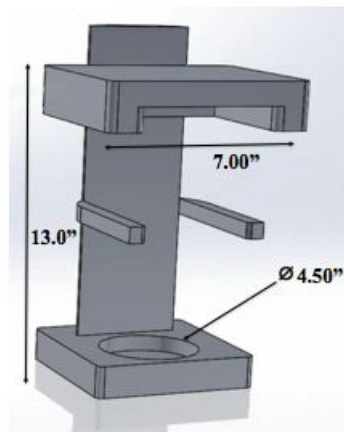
Pneumatic Container Opener drawn in SolidWorks.
